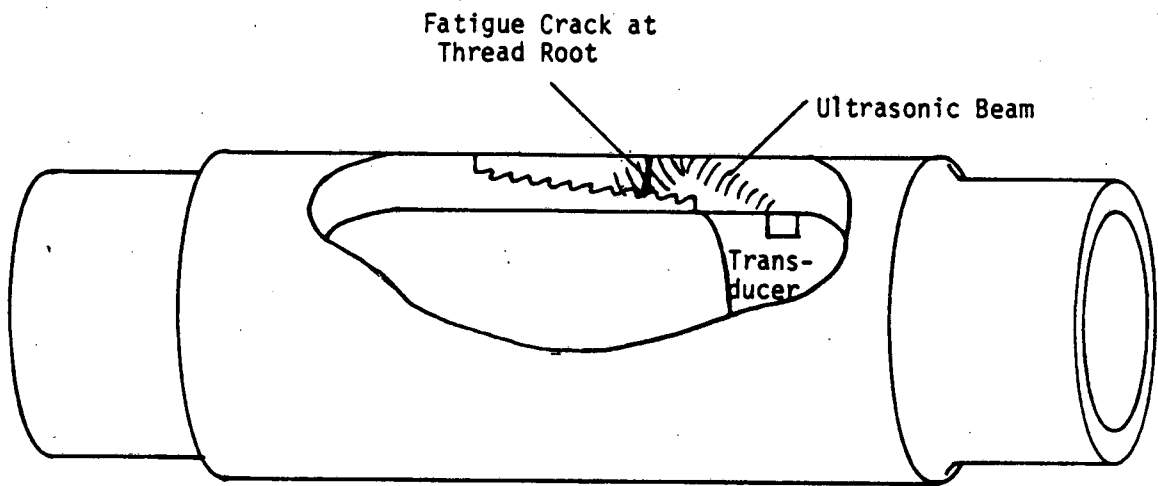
Threaded connector example of tension leg tendons with fatigue crack at root of thread.
